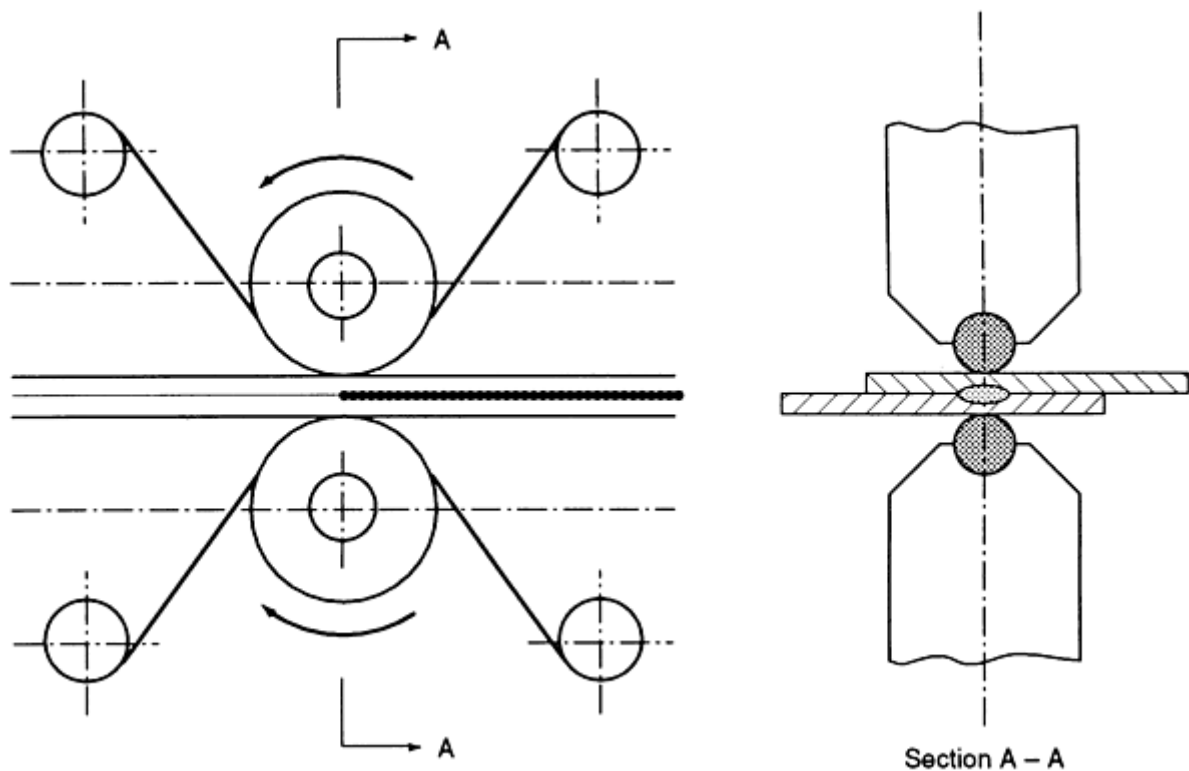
TYPICAL SETUP FOR AN ELECTRODE WIRE SEAM WELDING PROCESS SHOWING POSITIONS OF WIRE RELATIVE TO GROOVED WHEEL
